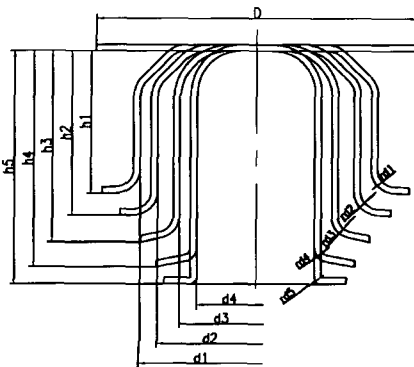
(b) Geometry of multi-stage deep drawing process for the present method
